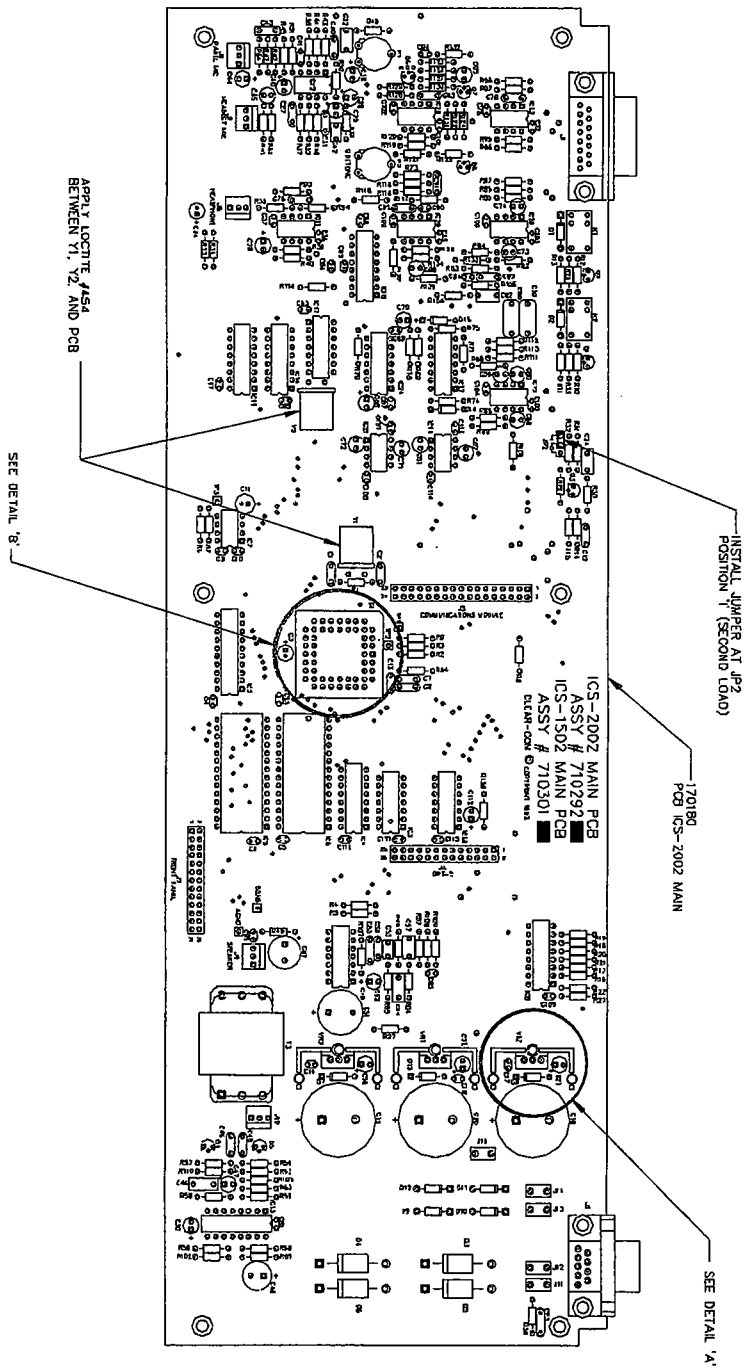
Assembly Drawing—ICS-2002 Main PCB
